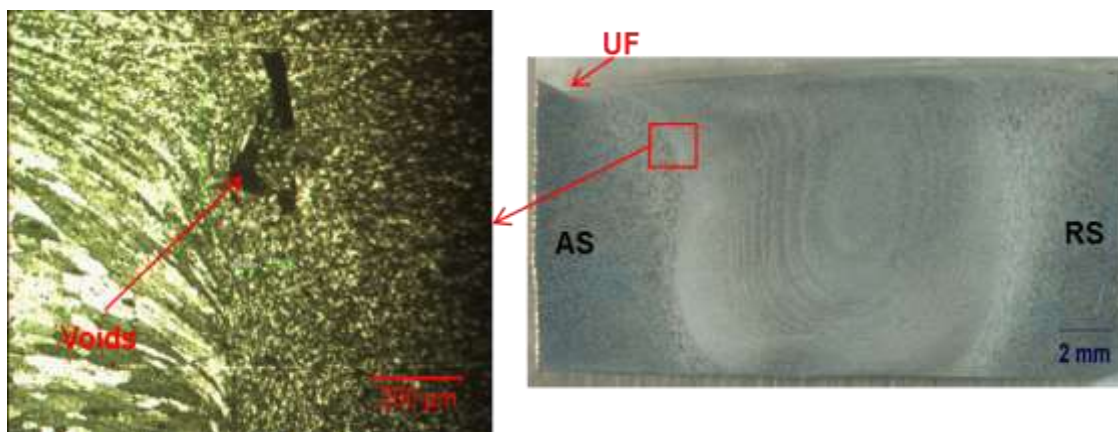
Hot-weld showing IV (left) and UF (right).
